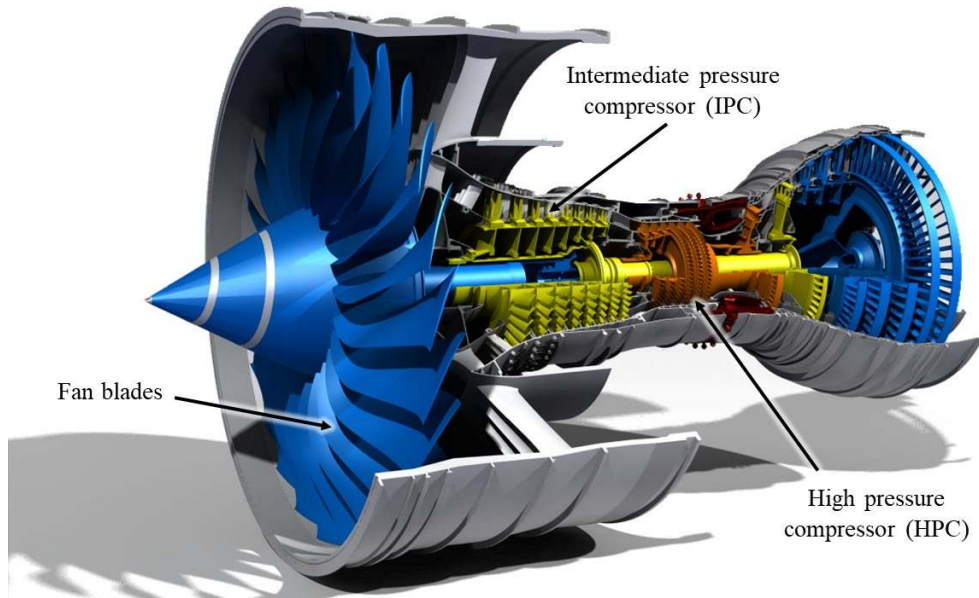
Cutaway view of the Rolls-Royce Trent 900 turbofan engine [92]
